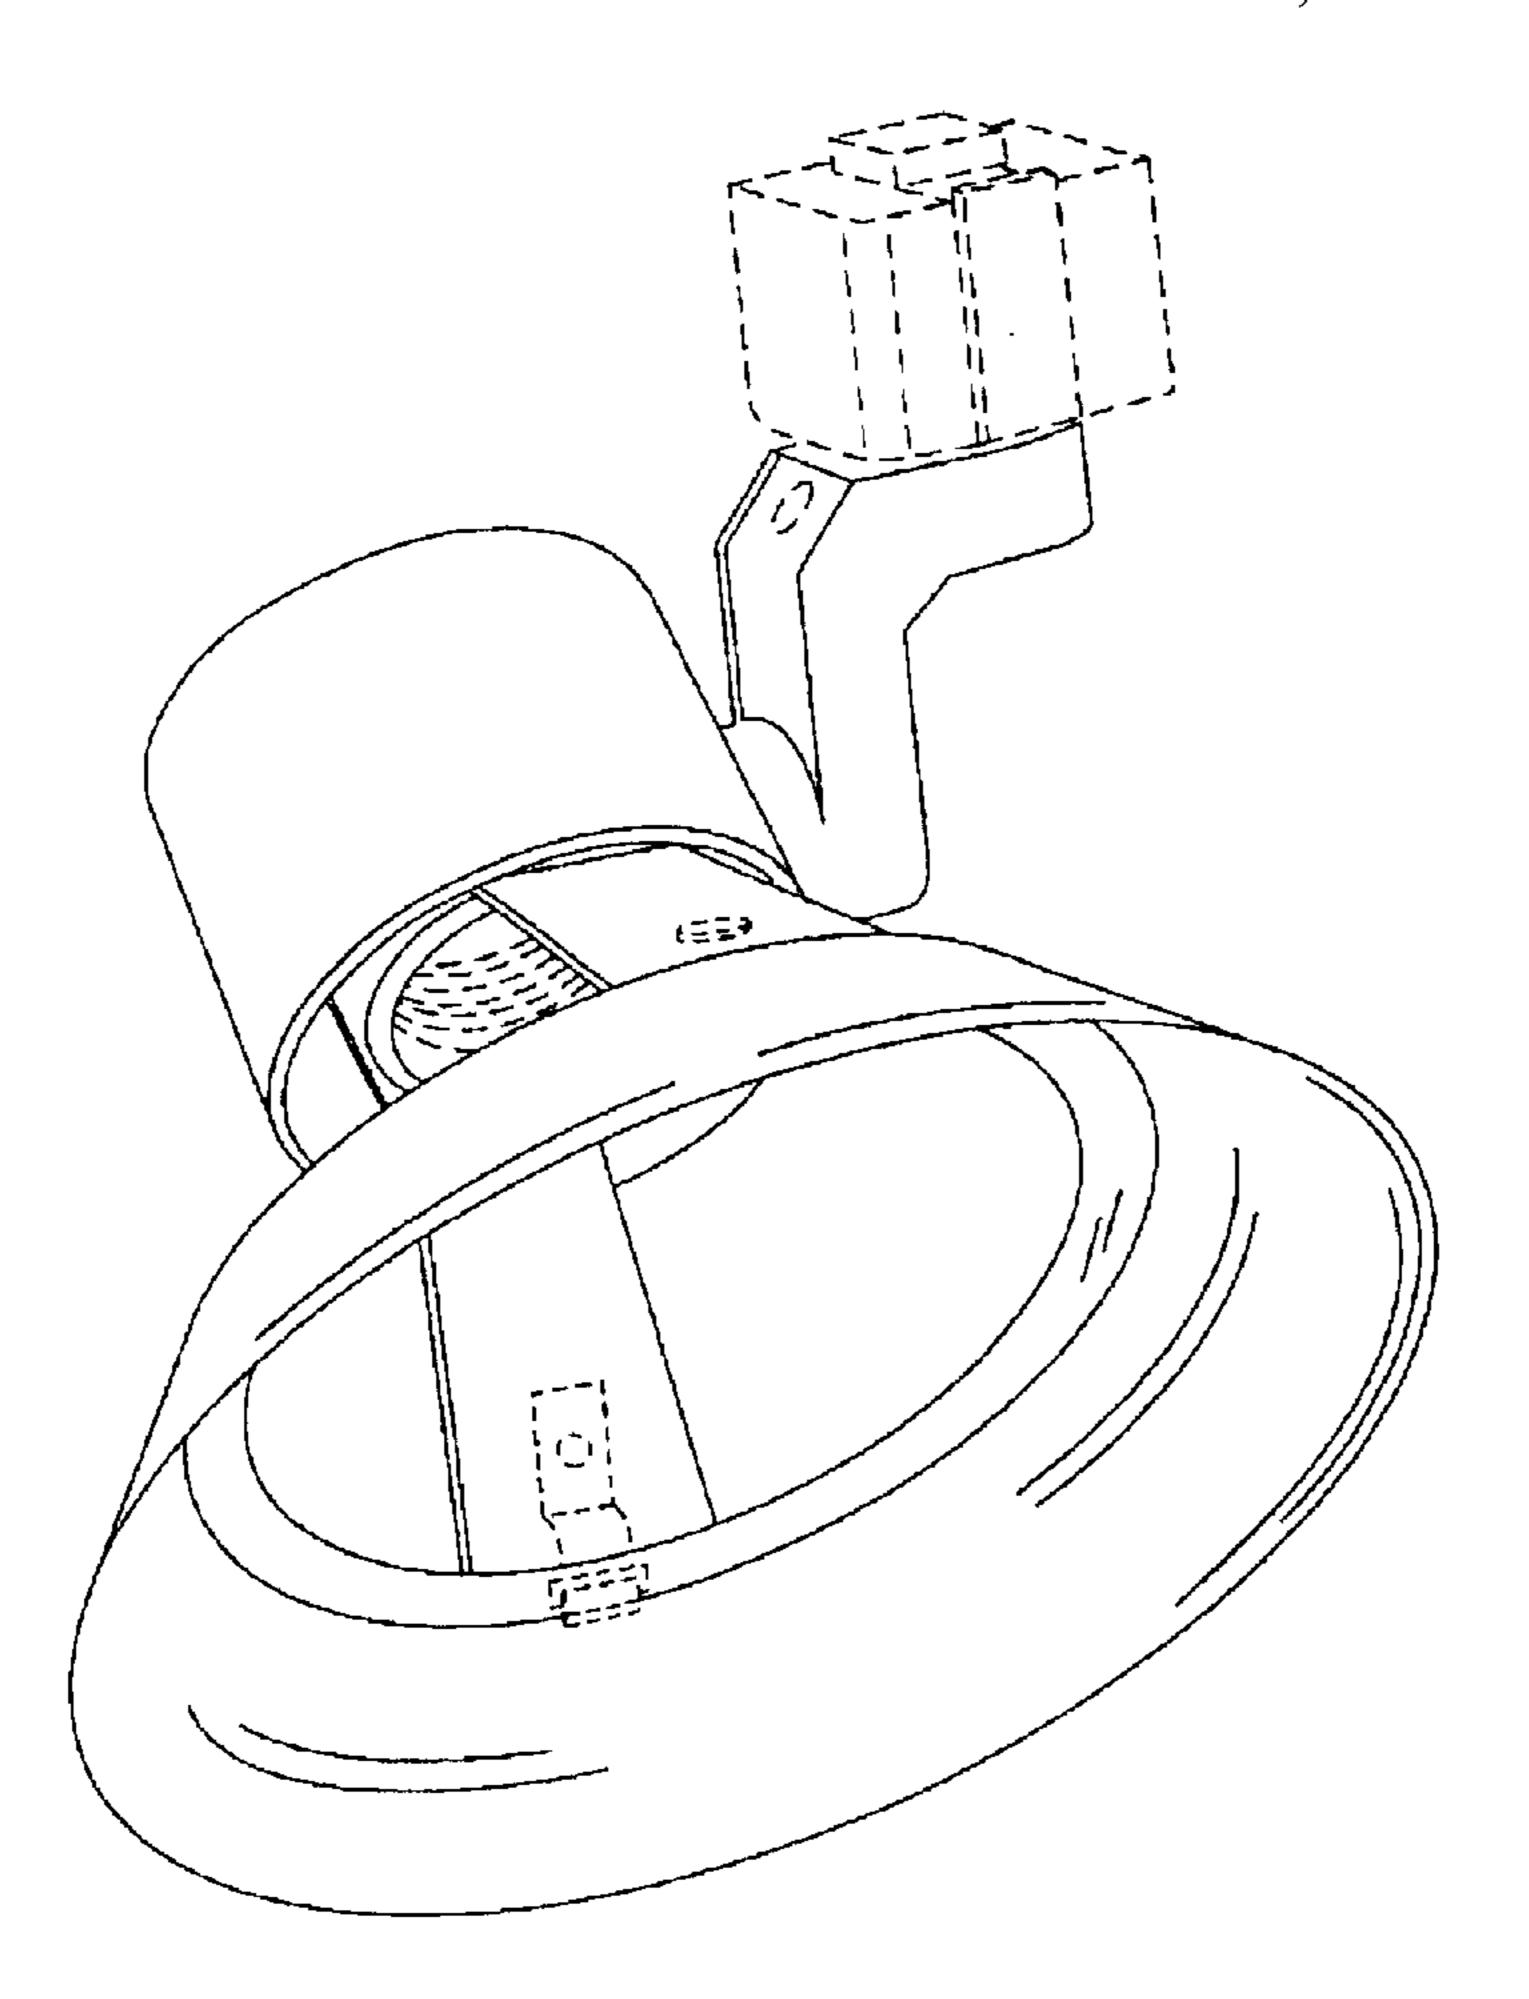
is a left side view of the lighting fixture with a flared gimbal ring shown in FIG. 1, the right side being a mirror image of the left side;
